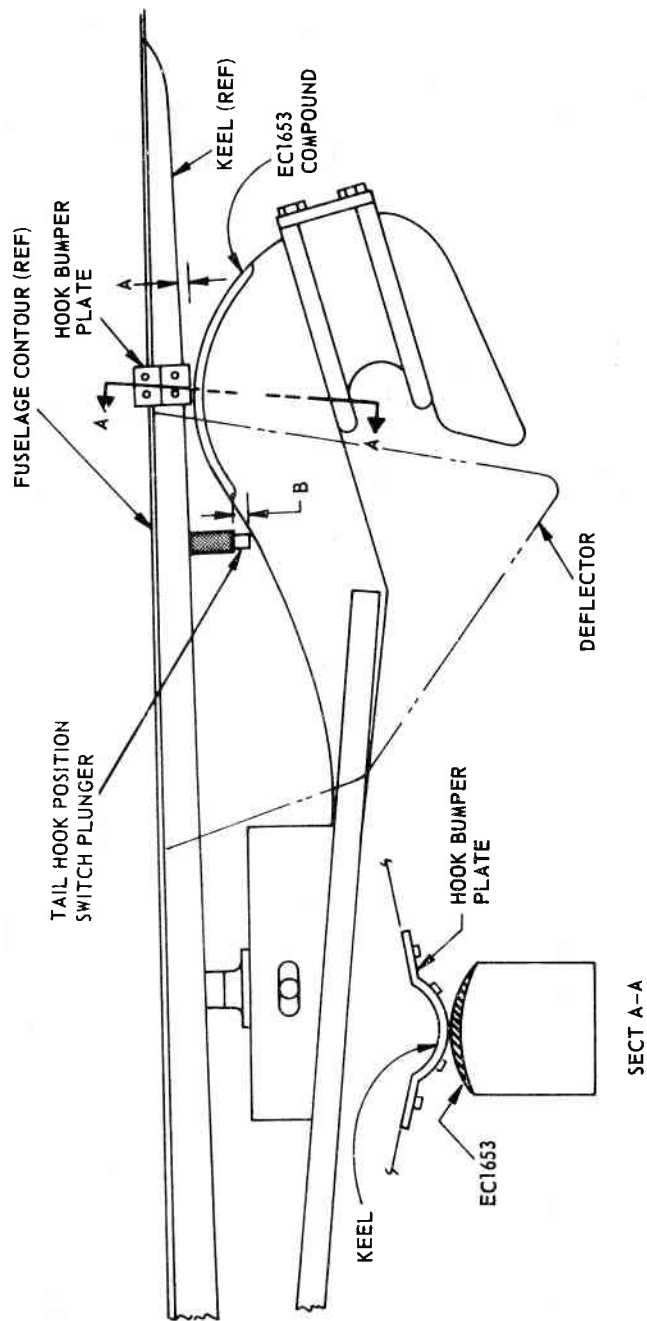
C. Tail Hook Bumper Pad and Bumper Plate Installation (Sheet 1 of 2)
